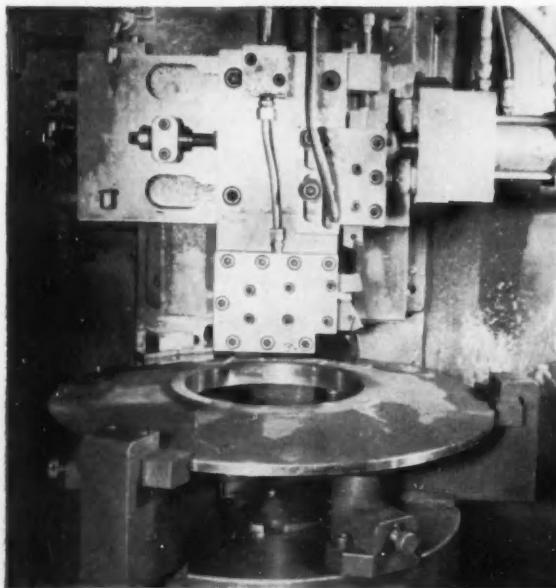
Manufacturing methods development led to the present method of producing the compressor rotor wheel shown in Fig. 1. As shown above, the hub bore and hub faces are rough turned on a special vertical lathe.
